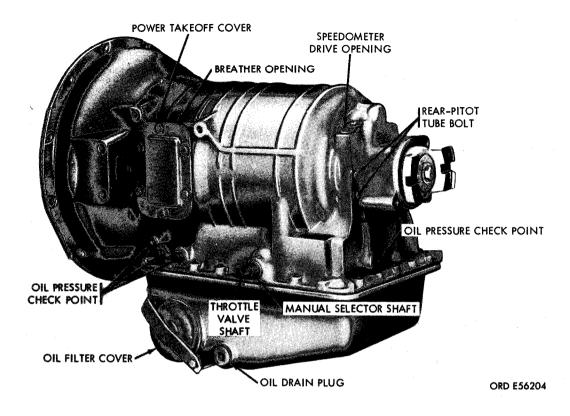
Model TX 100-1 transmission assembly—left rear view.
